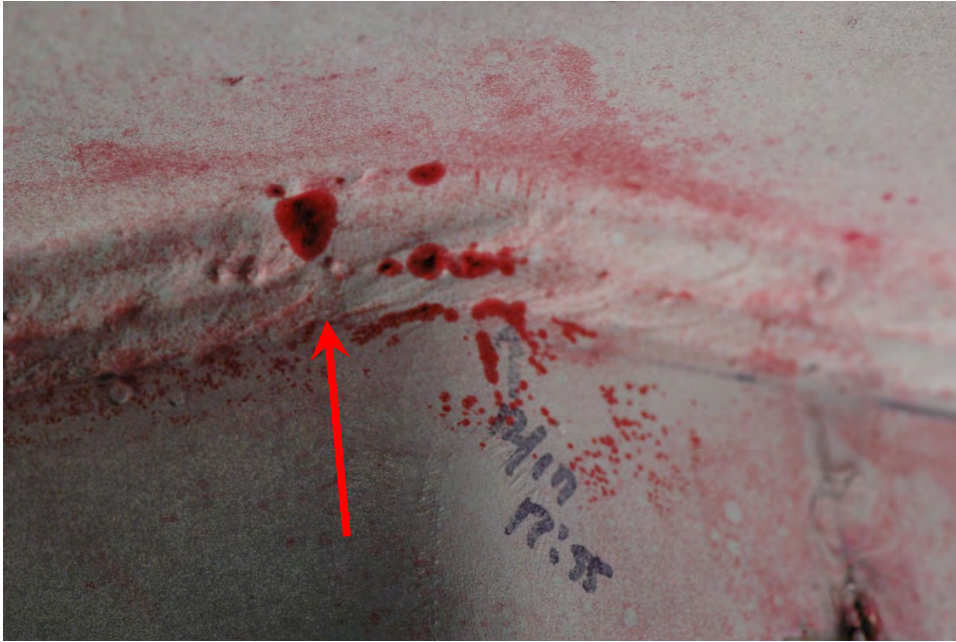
Fatigue cracking from bend corner in the arm of specimen VII-7
